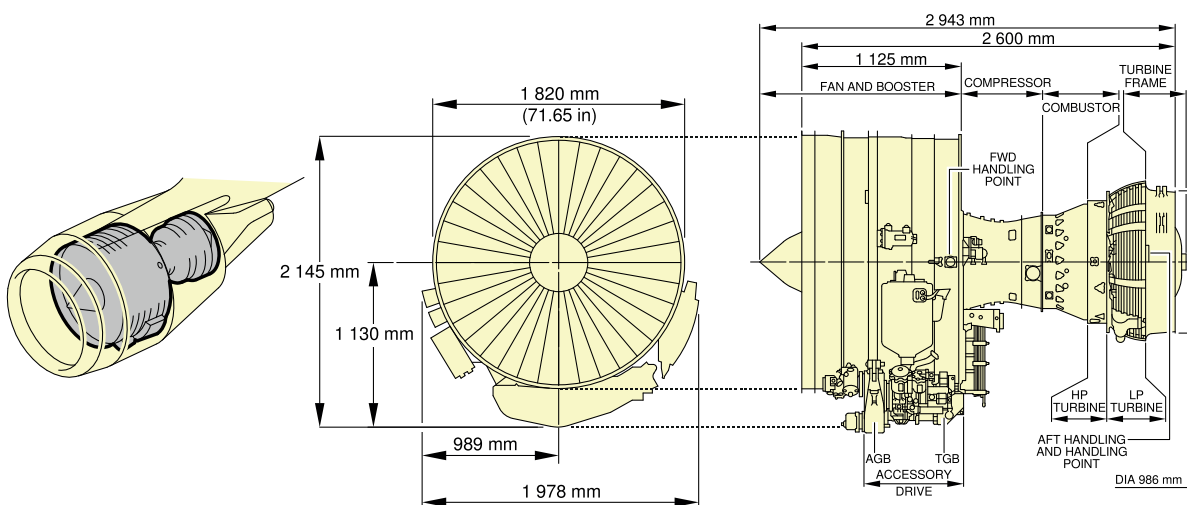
Technical drawing of the bare CFM56-5b engine as mounted on the A320-200 series, taken from A320 service manual [46]
